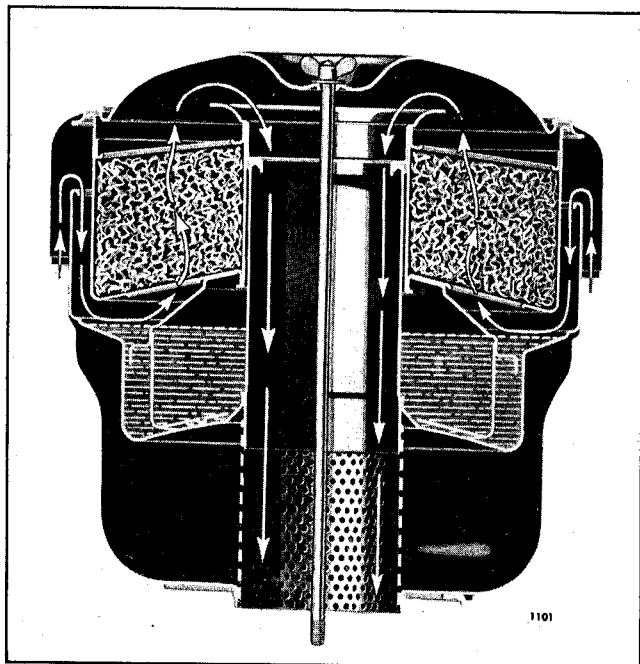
Oil Bath Air Cleaner and Silencer Assembly - Light-Duty
